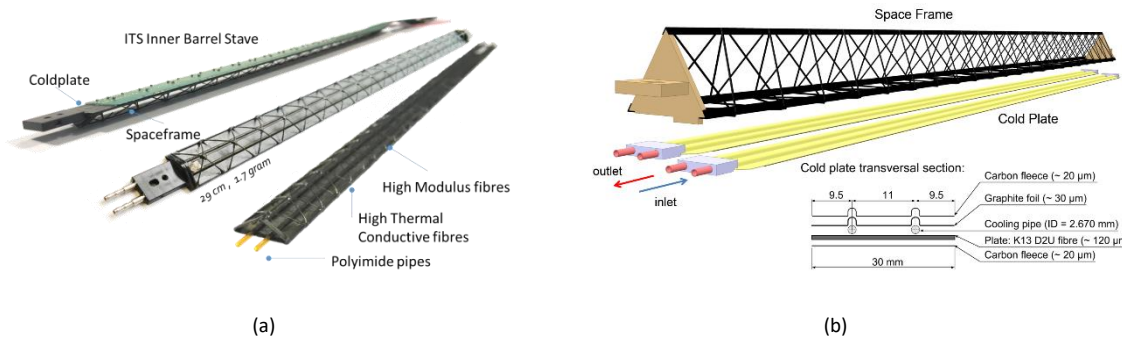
(a) ALICE ITS IB stave fully assembled [87] (b) Schematic layout of a stave of ALICE ITS OB (mechanical and cooling structure) [54].
